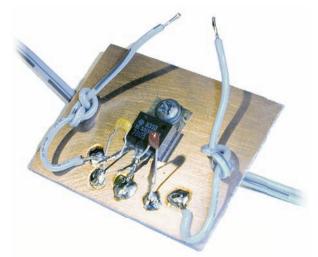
Dead bug or ugly-style construction uses the surface of unetched PCB material as the base for circuit assembly. Component leads are soldered directly to the PCB surface or to other leads. (Photos and graphics reprinted with permission from Circuitbuilding Do-It-Yourself for Dummies, Wiley Publishing.)
